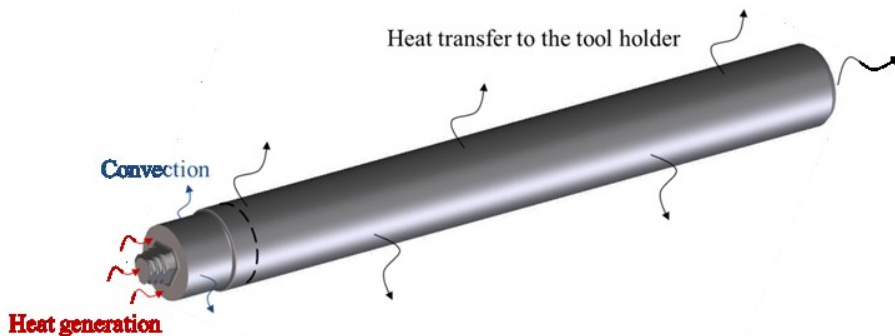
Schematic illustration of boundary conditions for the thermal analysis of the welding tool
